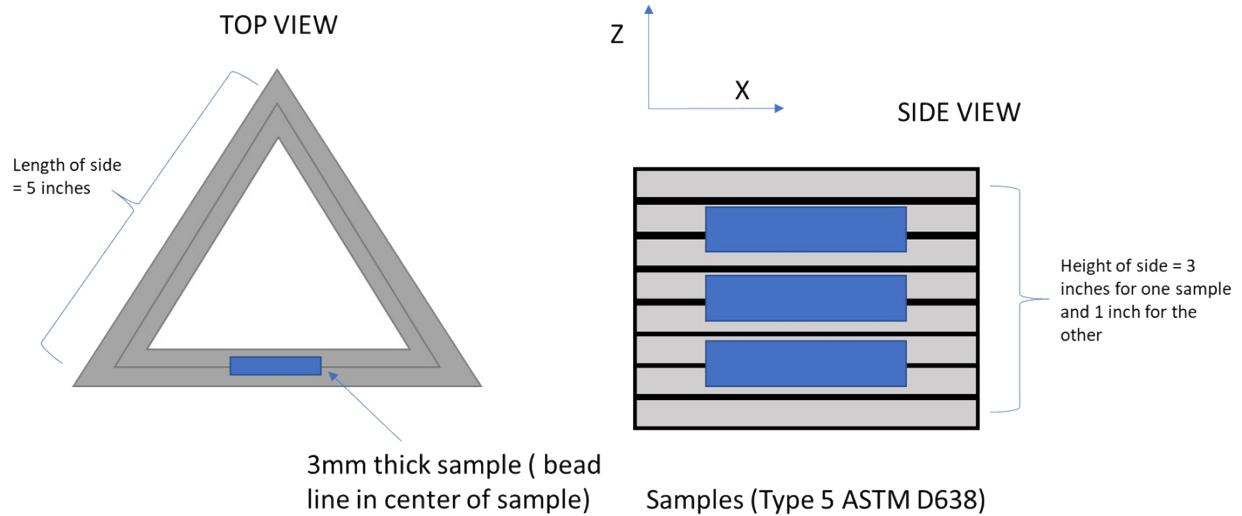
Top and side views of the printed triangle, noting printing direction and location of milled out specimen.
